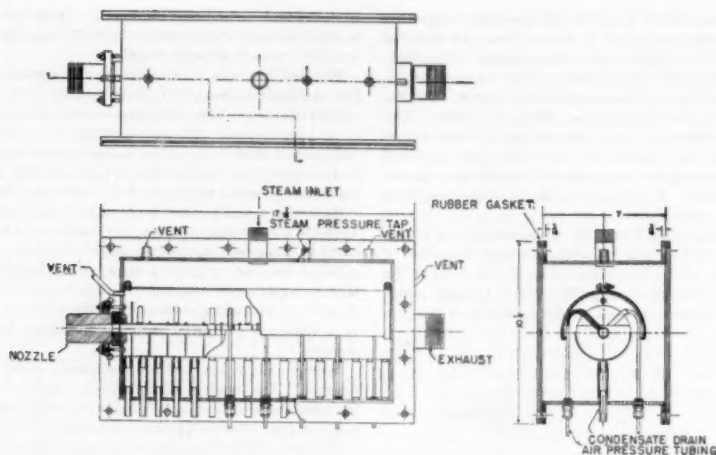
TEST PIPE AND JACKET FOR HEAT-TRANSFER TESTS
